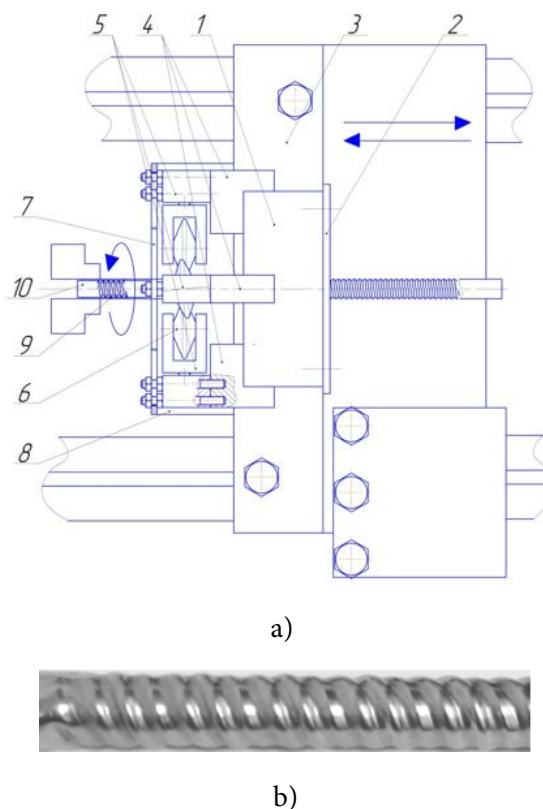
The schematic diagram of equipment operation with a three-roll spinning-head (a) and the picture of the three-start helical tube produced without mandrel
